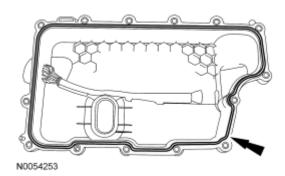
Inspecting Transaxle Main Control Cover Seal For Damage Courtesy of FORD MOTOR CO.
